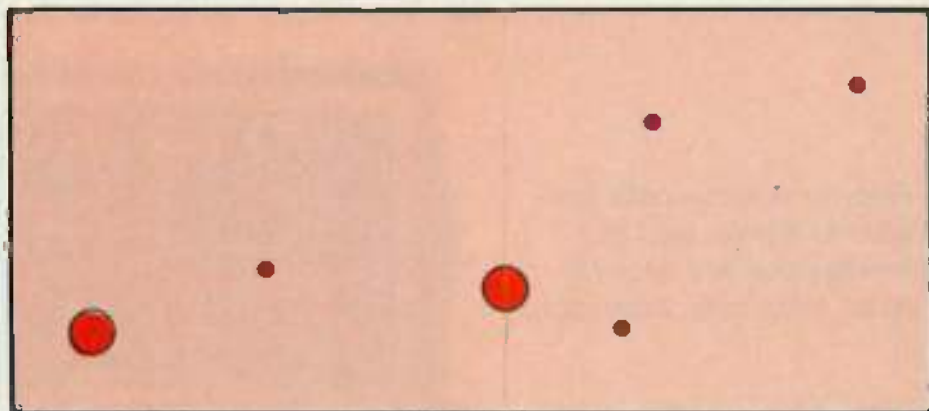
IF YOU USE THE CABINET specified in the Parts List, using this template will simplify drilling the rear panel.
